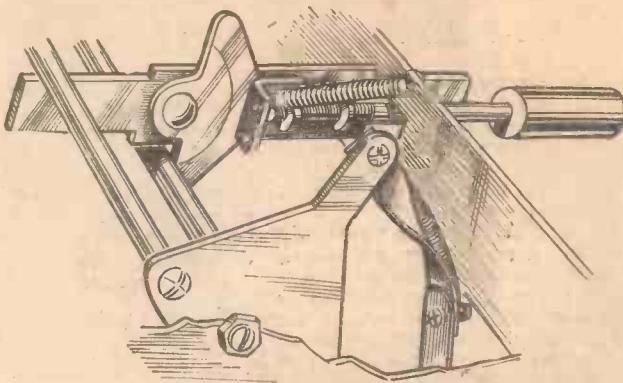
How the mechanism operates, one push bar only being shown for clarity.
